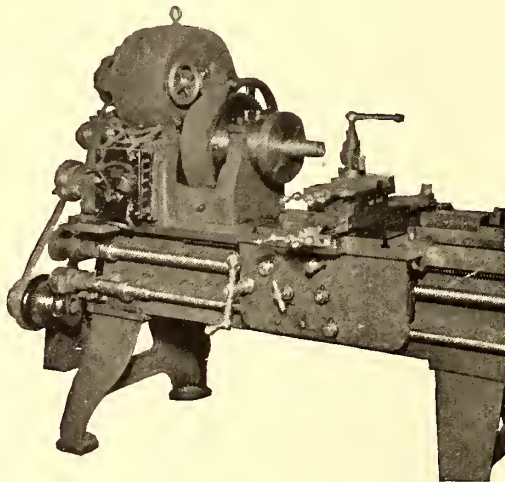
VARIABLE-SPEED MOTOR ON 16-IN. LATHE
